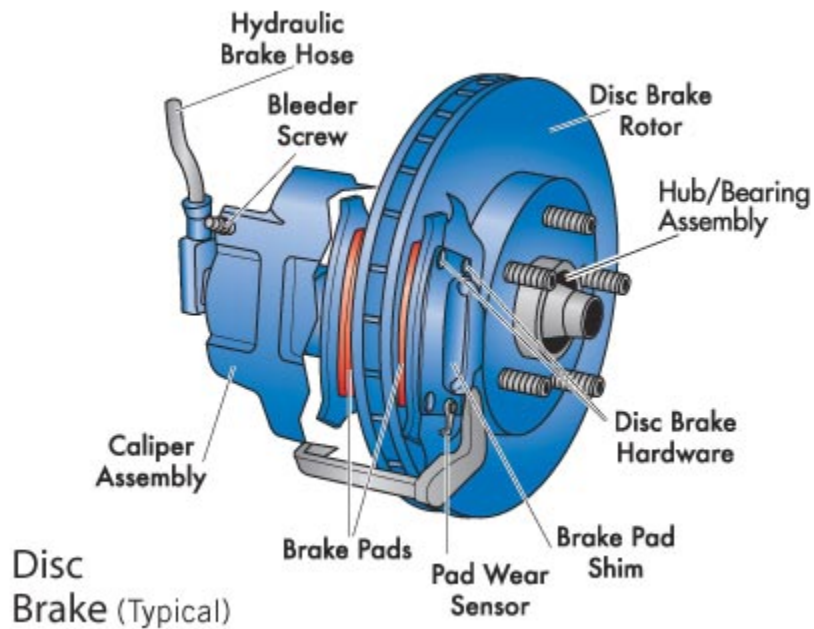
Disc Brake Assembly (Image courtesy of Midas)
